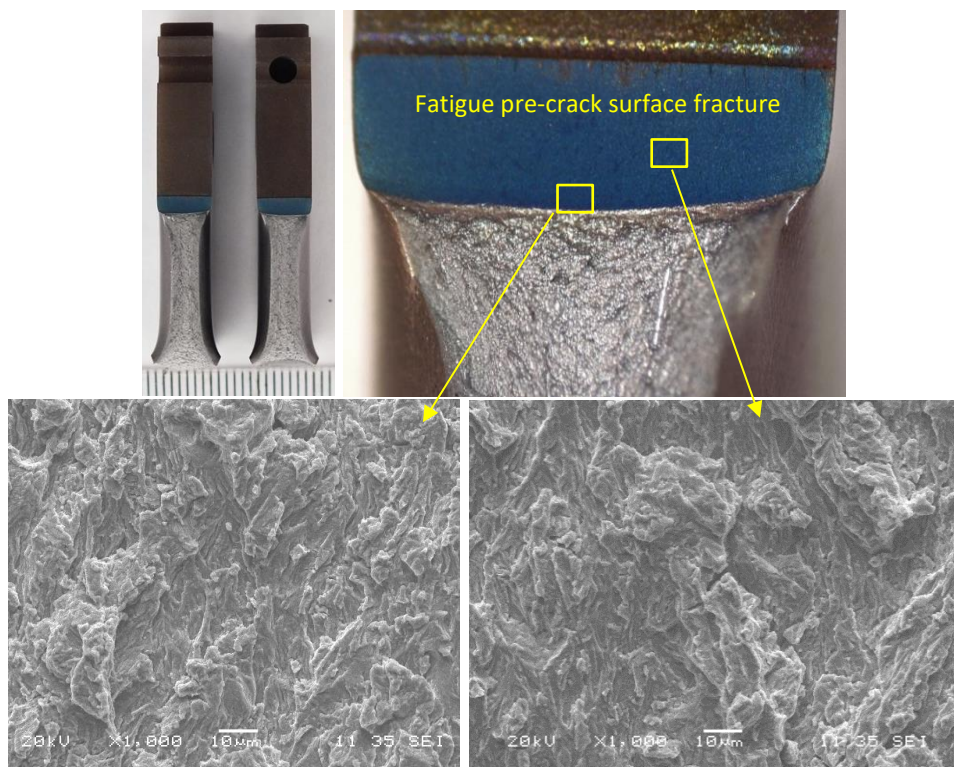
(Up left) two heat tinted fracture surfaces in a X70 CT-WOL tested specimen; (up right) detail of the tinted fatigue precrack; SEM micrographs of the fracture surface in the fatigue pre-crack and in the crack front
